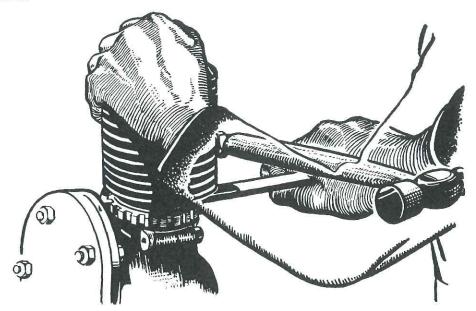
Tightening Clamping Ring. Hold hammer shaft against delivery valve union to prevent movement of cylinder. With "C" spanner tighten clamping ring.
